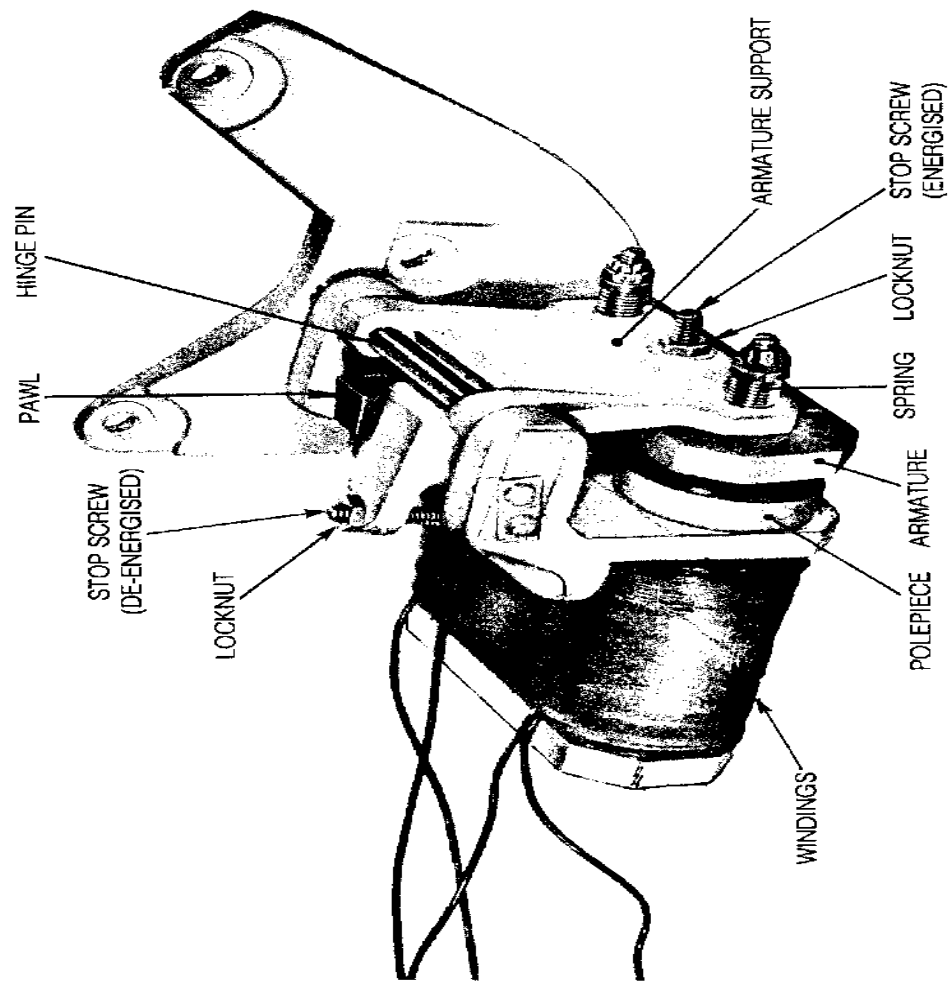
Western Cullen Hayes mechanism – hold-clear assembly
